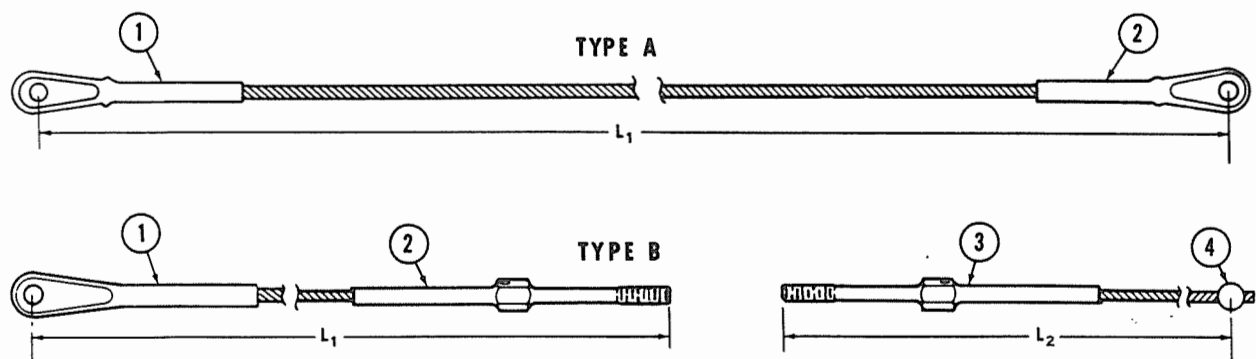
(Sheet 7 of 7 Sheets). Carburetor Air Control System — Cable Charts and Cable Assemblies
